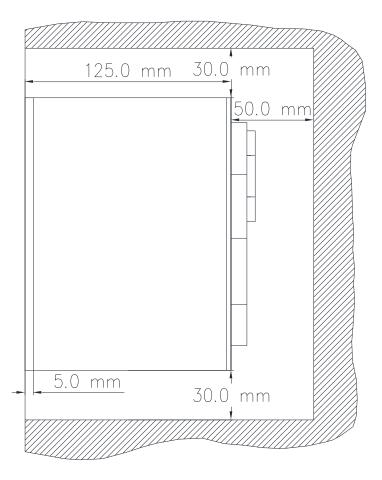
FPC 400 side view with recommended spacing and grounding connection
